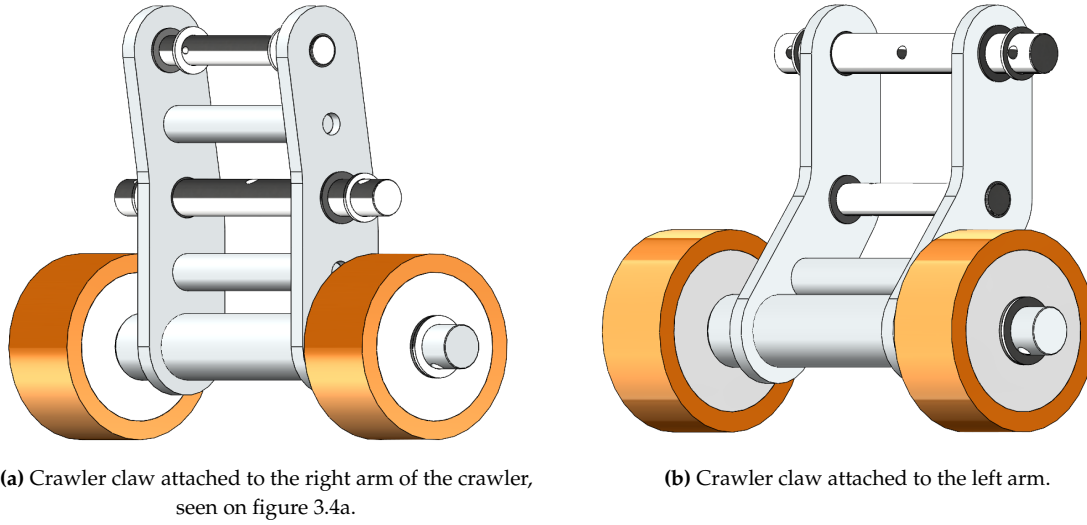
3D CAD model for the crawler claws containing the non-motorized wheels.
